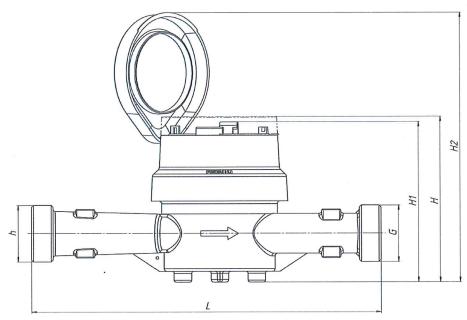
Installation dimensions (Standard version JS-02, JS130-02)
